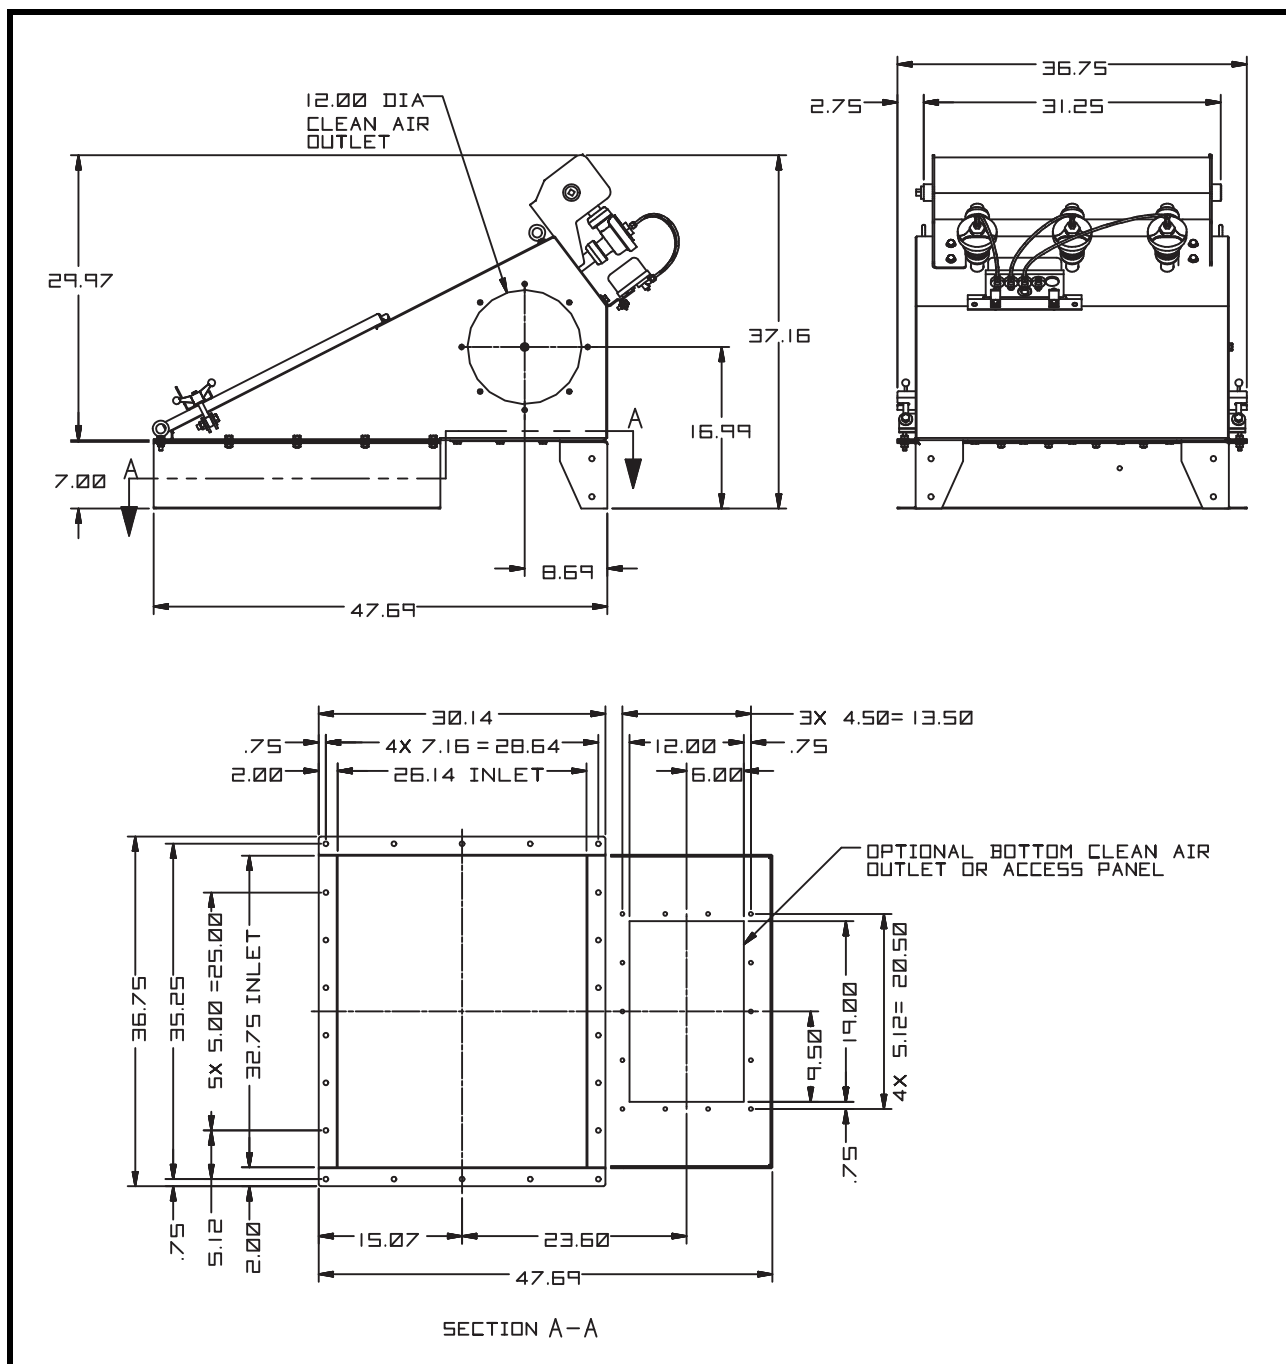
Dimensions for MARTIN® Insertable Dust Collector, P/N INS-15XX
